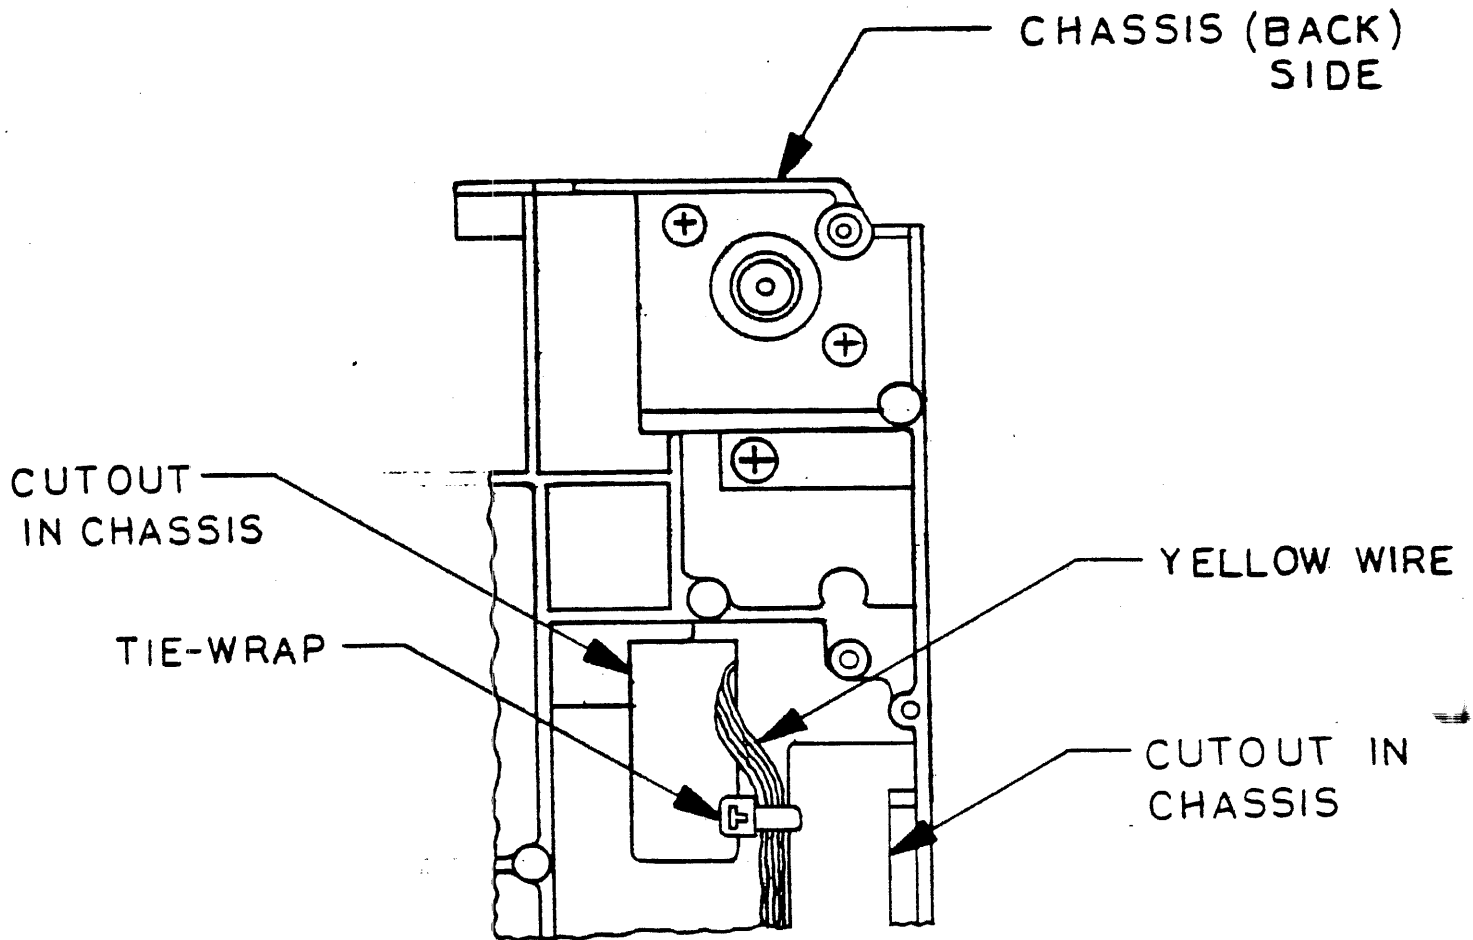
THE TIE-WRAPPING OF THE DUAL SWITCH WIRING HARNESS. (BOTTOM VIEW)
